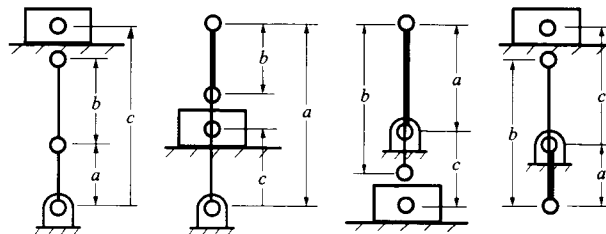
Positions for which the slider-crank mechanism cannot be assembled.
